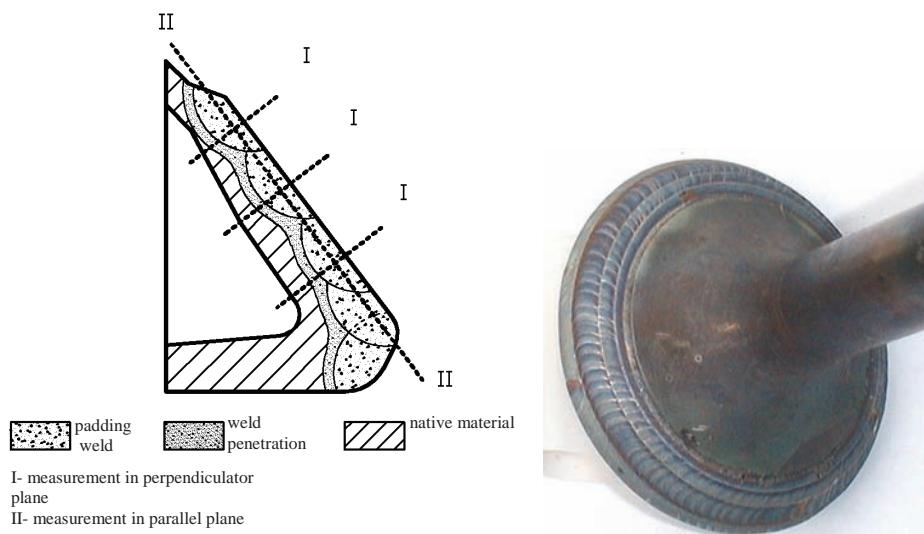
An ASz62 engine valve that was laser pad welded with stellite: a) - a cross-section of the valve fragment with microhardness measurement planes marked; b) - an image of the valve after pad welding
